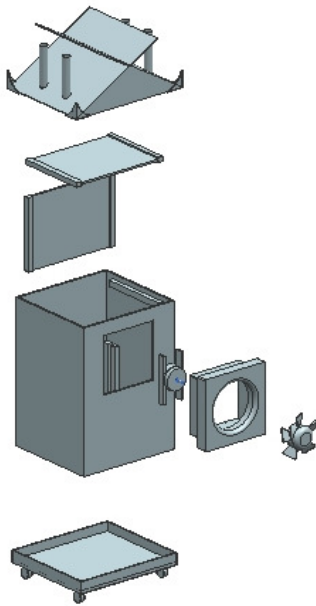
Exploded model of air filtering system to show the assembly relations between the parts.
